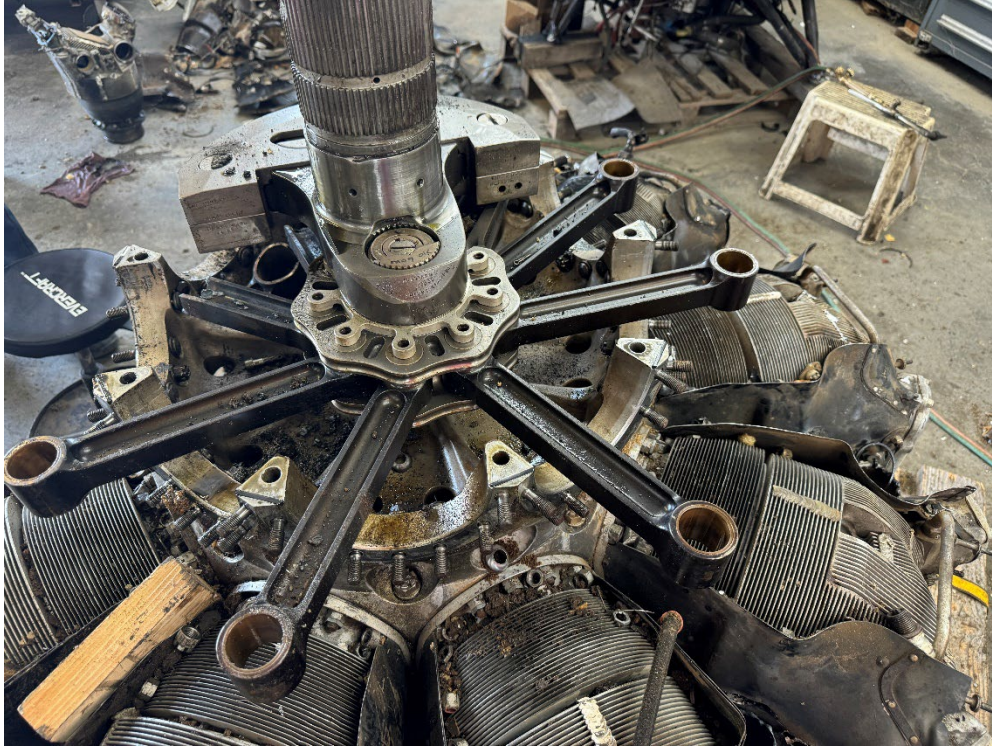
View of the front link rods, master rod, and crankshaft bearing assemblies.
